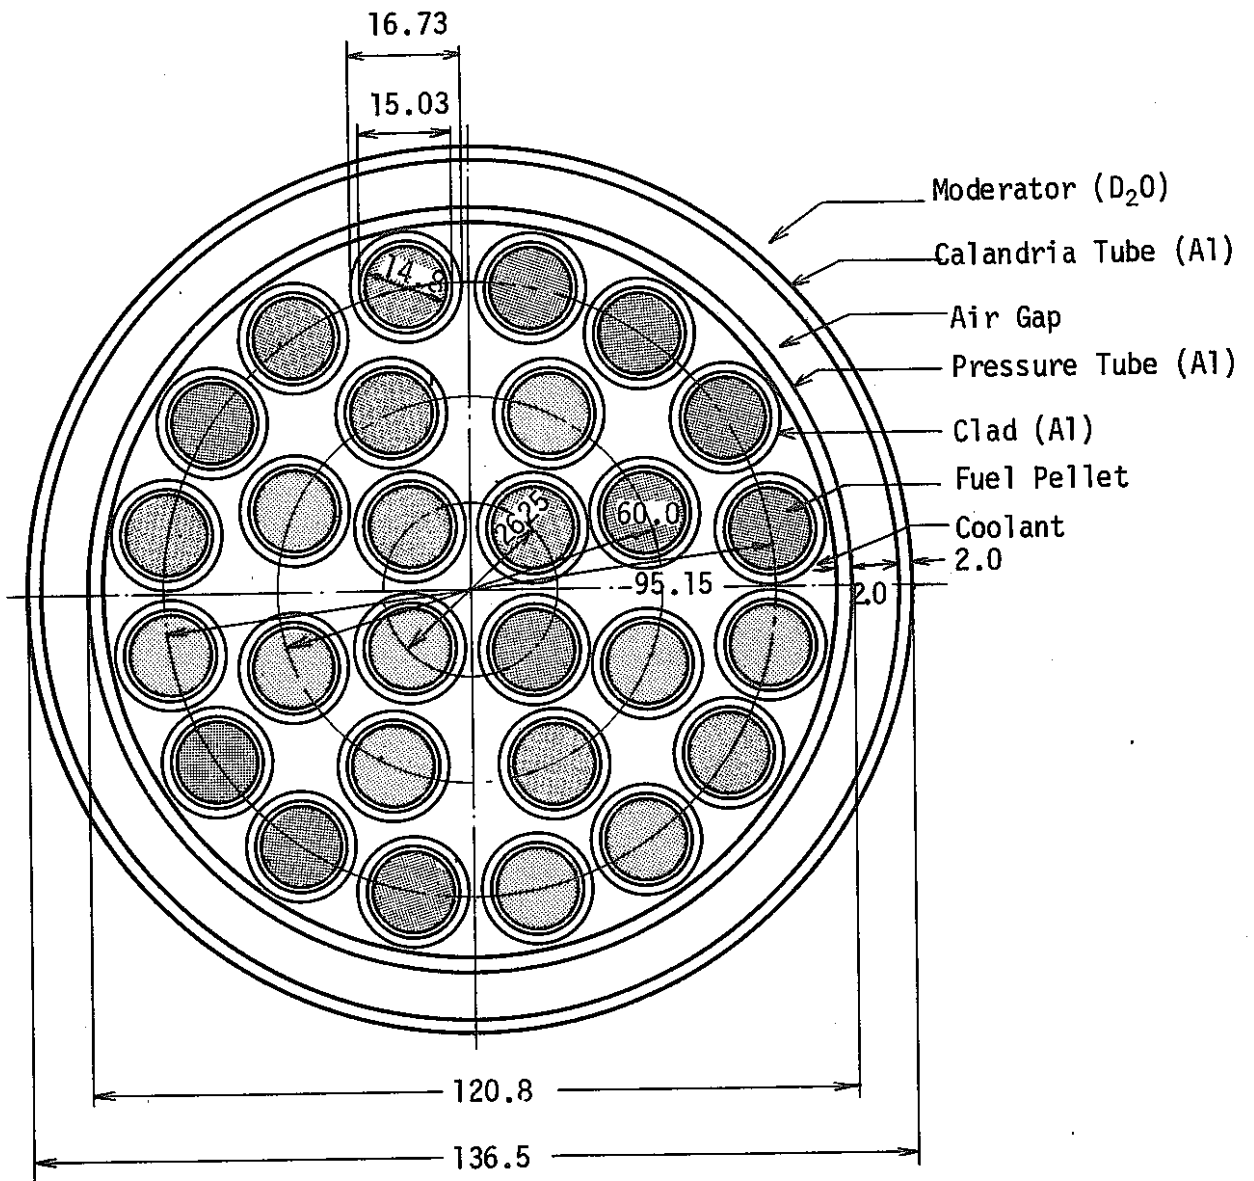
Cross-sectional view of 28-rod UO_2 fuel assembly
